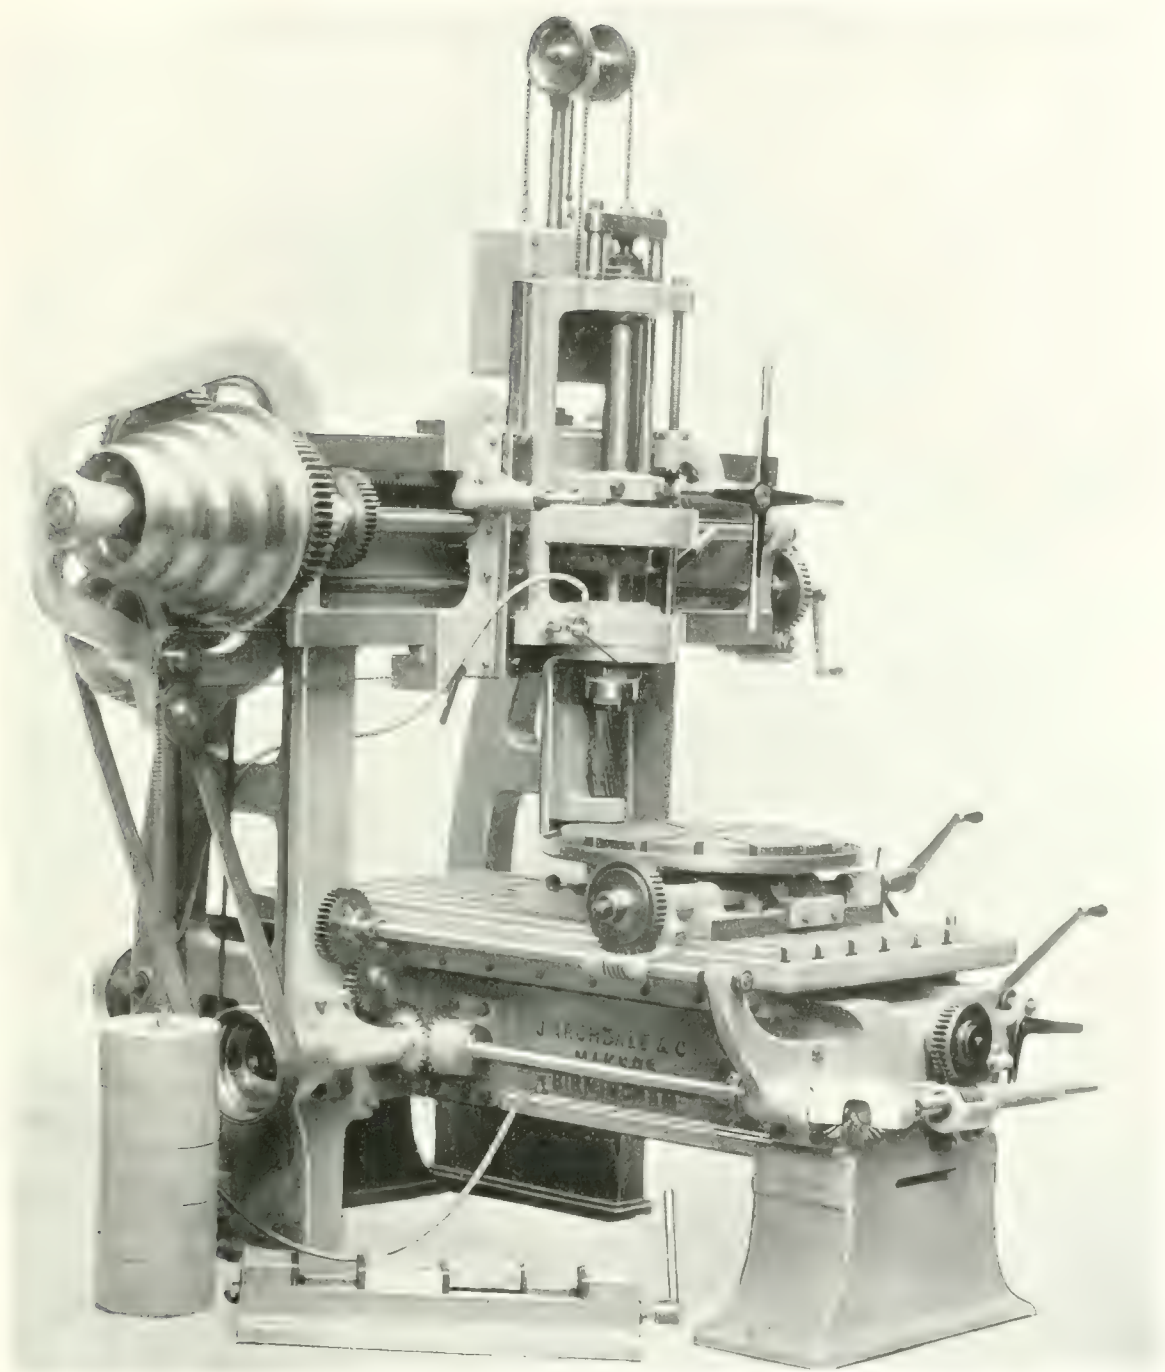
VERTICAL MILLING MACHINE, WITH GRINDING WHEEL.
